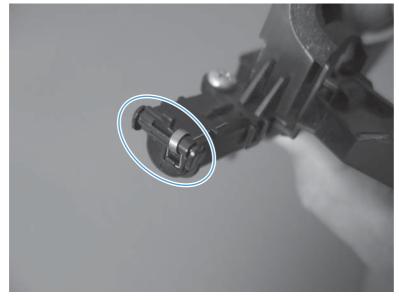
Remove the residual toner feed motor (7 of 7)
